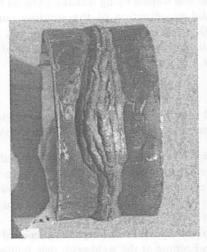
Photograph showing pipe # 2 (rewelded from outside)
